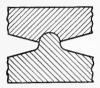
Pivot bearing as used on an adjustable vise jaw.
